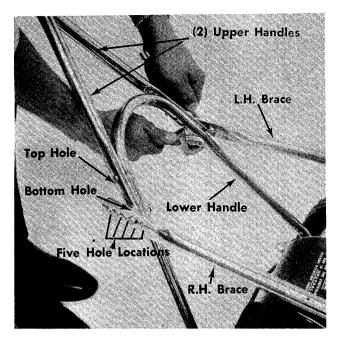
HANDLE AND BRACE ASSEMBLY
